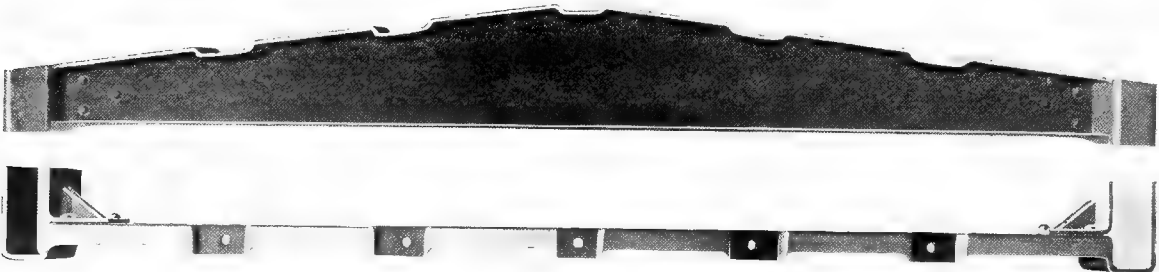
Pressed Steel End Plate. Cleveland Car Specialty Company.
